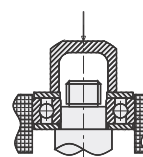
Simultaneous Press Fitting of Inner and Outer Rings
